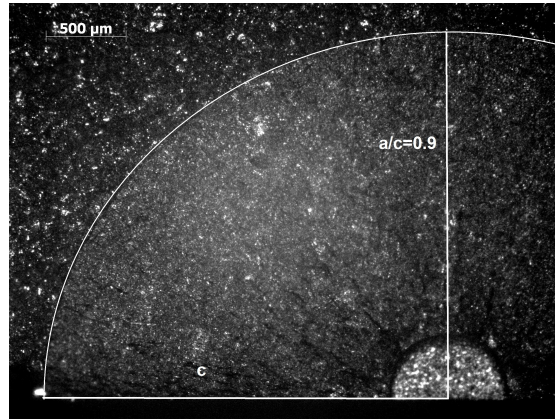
Fracture surface after the end of a fatigue test.
